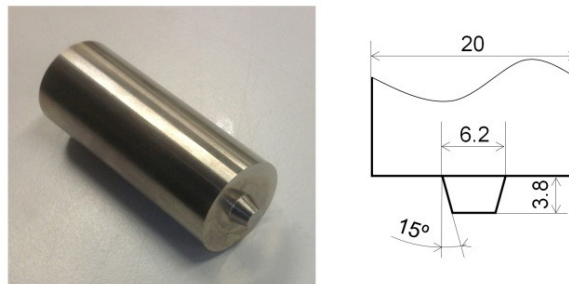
Tool used in the FSW process (dimensions in mm).
